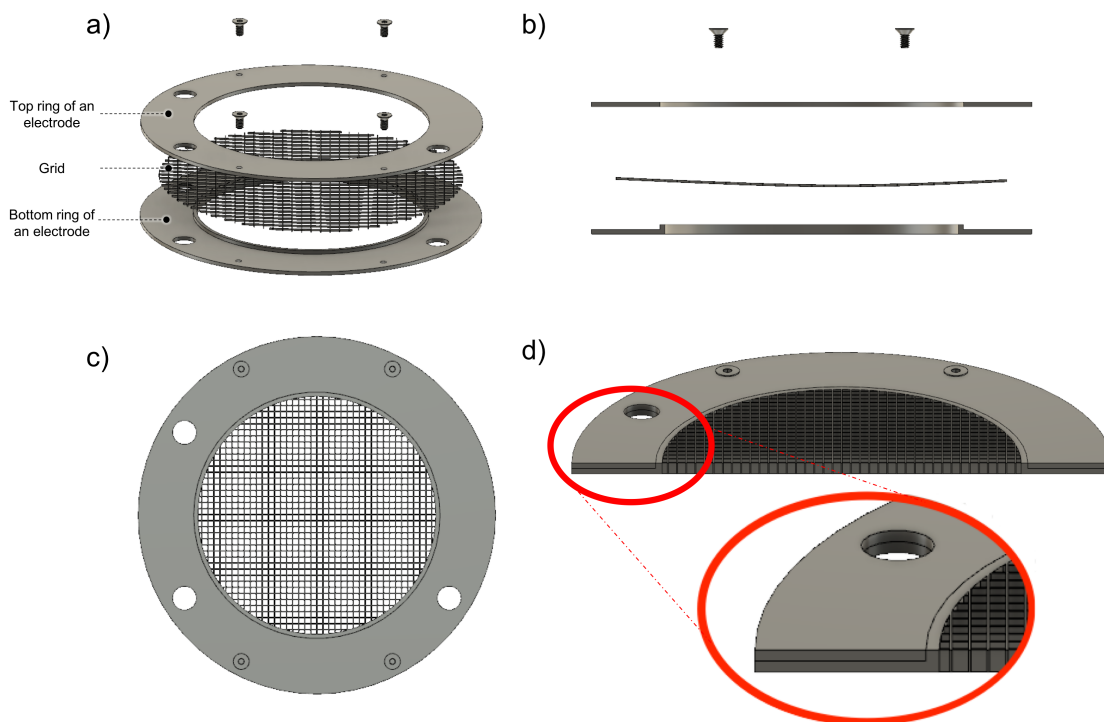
Schematic view of the *sandwich system* of electrodes: a) and b) in the process of assembling; and c) and d) after being assembled. b) and d) show cross-sectional views.
